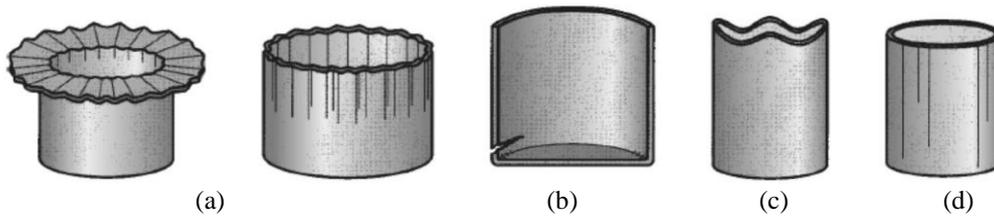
Various Defects in Deep Drawing Process [2]
